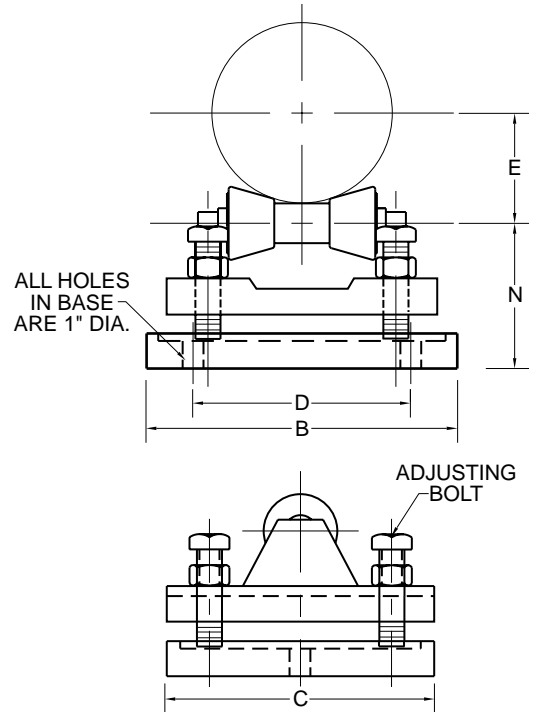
ADJUSTABLE STEEL CHAIR AND ROLL
